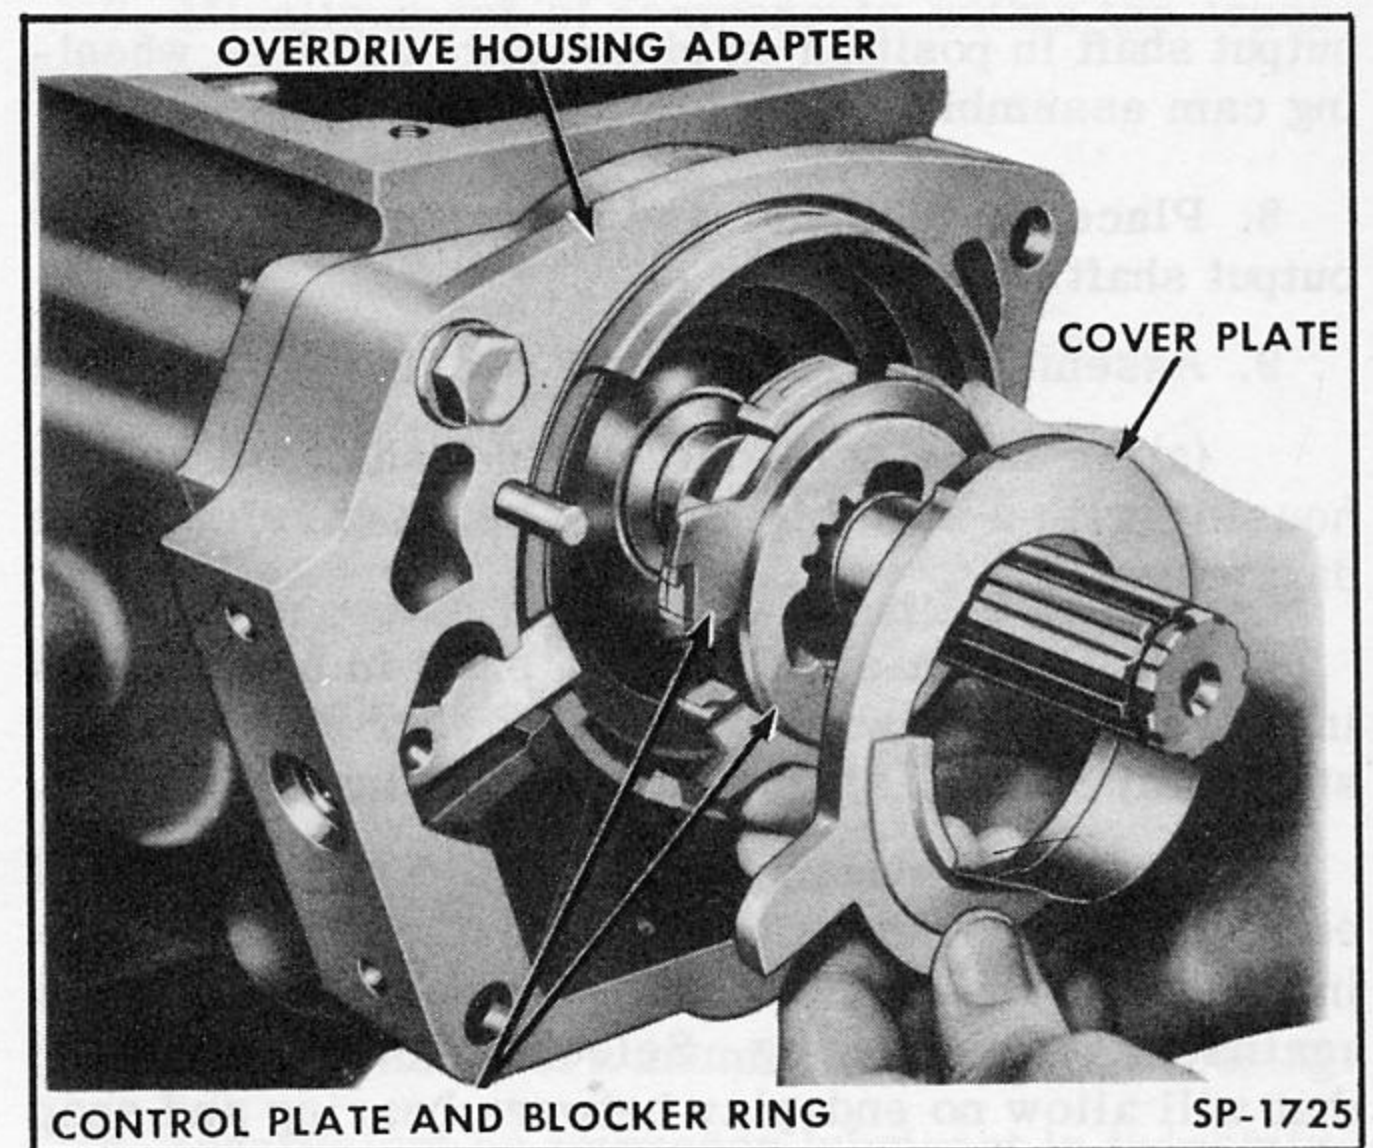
Installing Control Plate, Blocker Ring and Cover Plate
